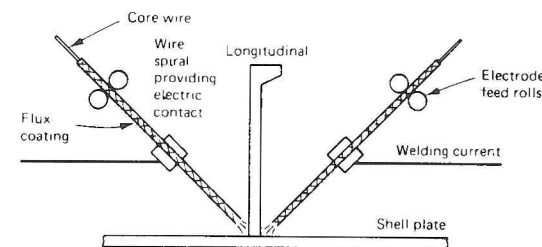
Automatic flux coated electrode welding using a twin-headed machine
